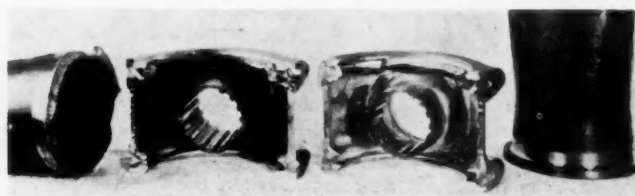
Failure of Hollow Steel-Hub and Blade on the Testing Machine
